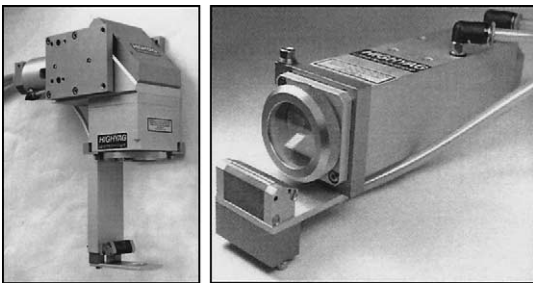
Optical head with cross-jet integrated used for weld with material addition.
